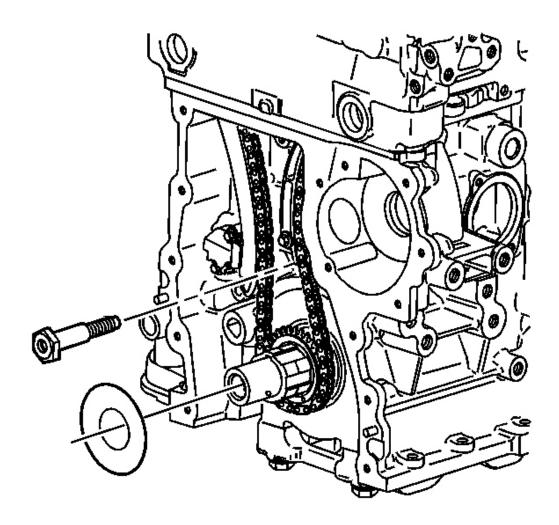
View Of Crankshaft Snout, Balancer Friction Washer & Bolt Courtesy of GENERAL MOTORS CORP.
